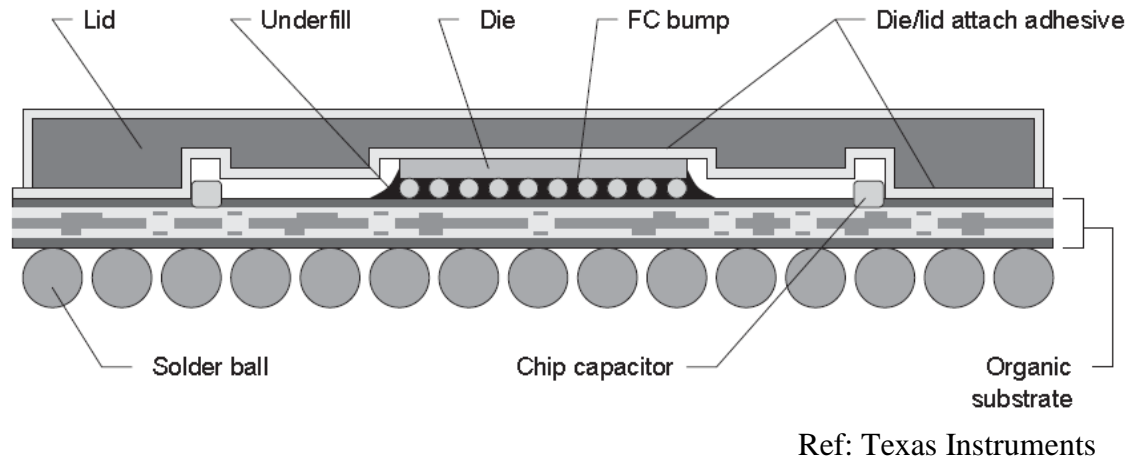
A Cross-sectional view of typical Flip-Chip BGA package
